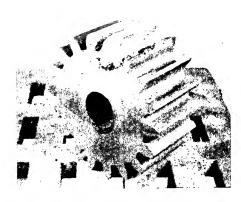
Observe how closely the builtup bronze tooth matches the others.
